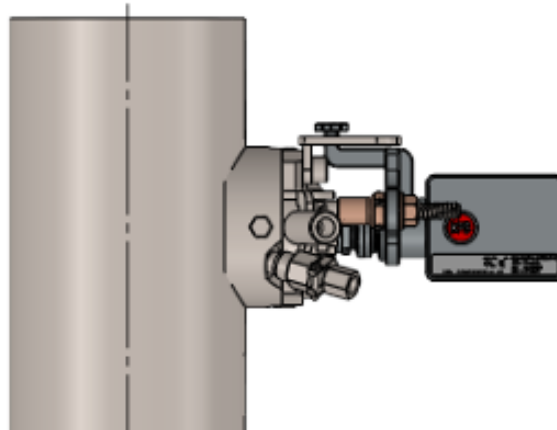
PASVE® installation in vertical pipeline. Drawing 10728.
